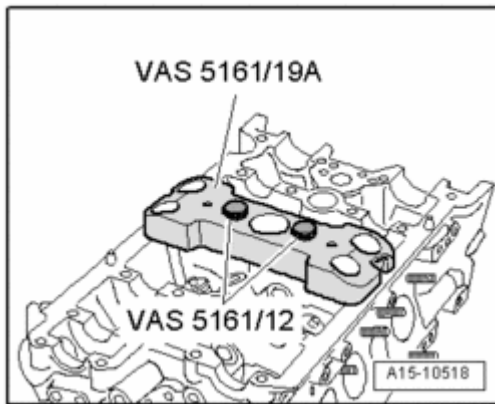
Placing Guide Plate VAS 5161/19 A From Valve Cotter Disassembly/Assembly Device VAS 5161 On Cylinder Head
